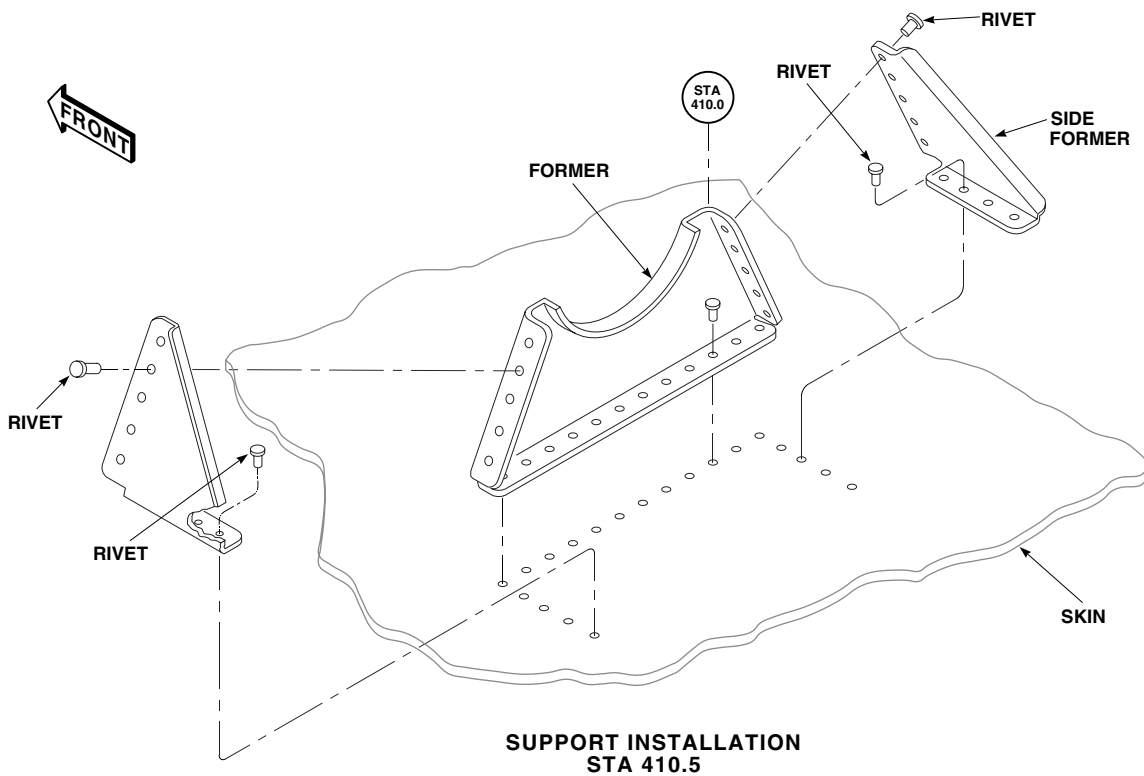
Replace Oil Cooler Rear Support (AVIM).
